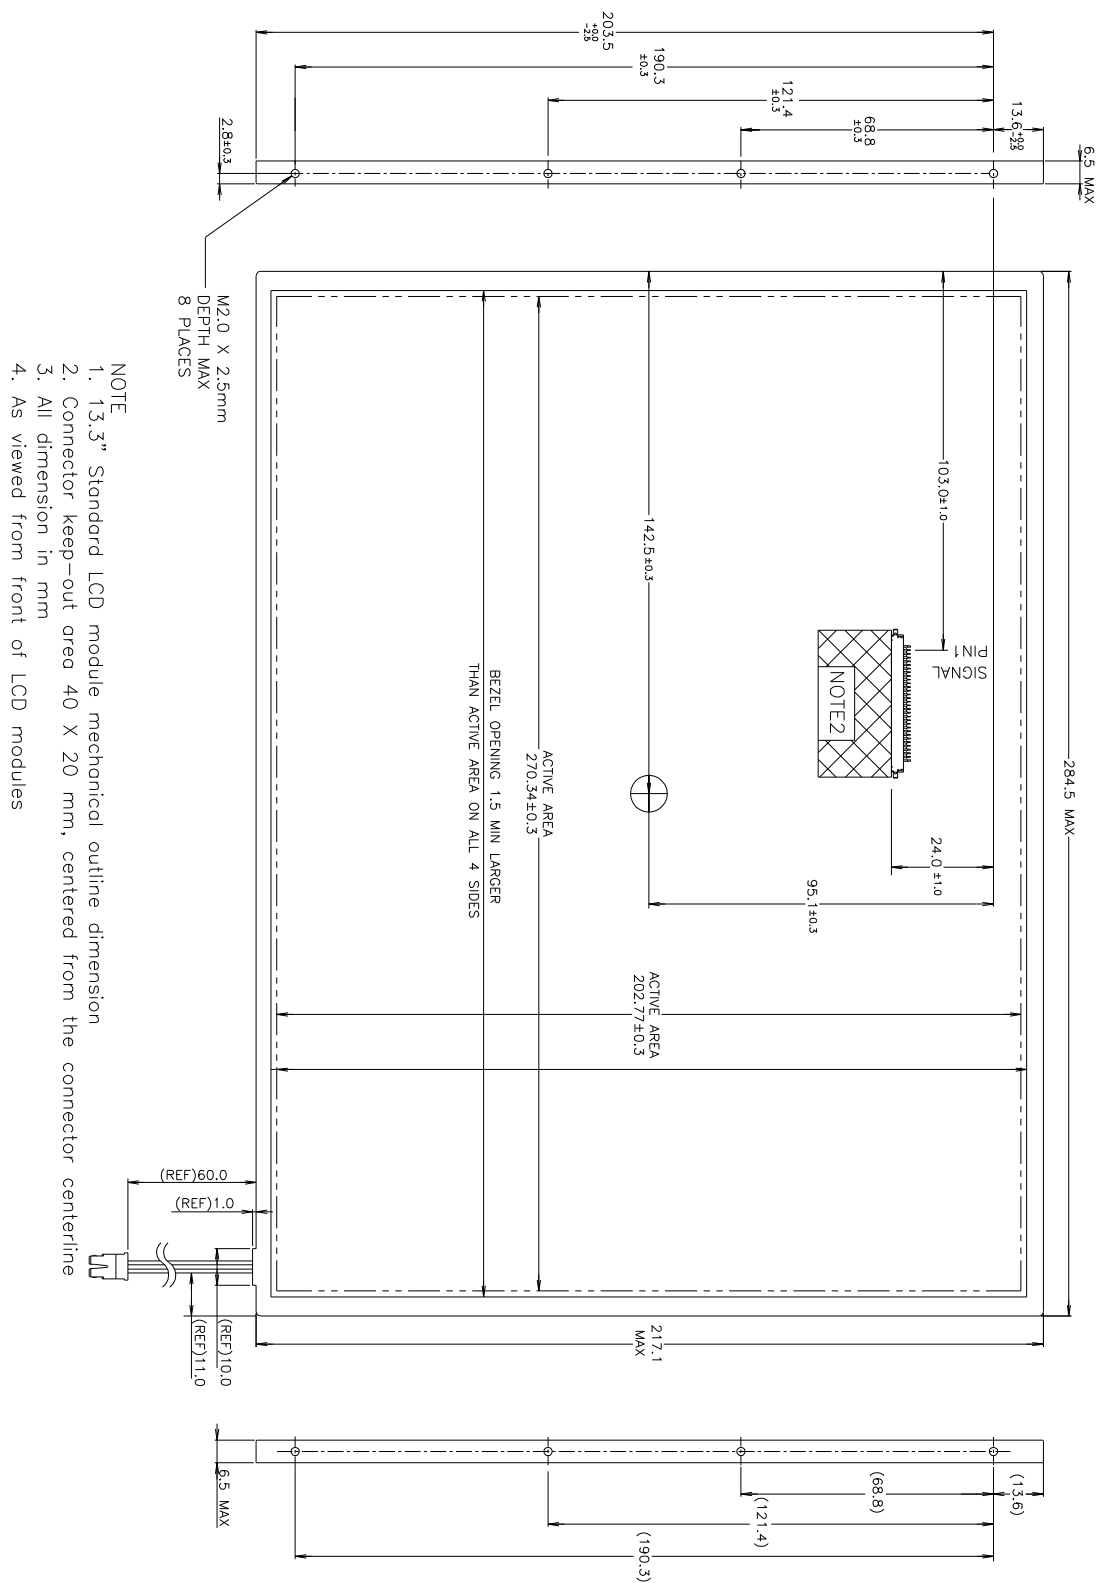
13.3-inch Standard Single CCFL Mechanical Outline Dimension (Front View)
